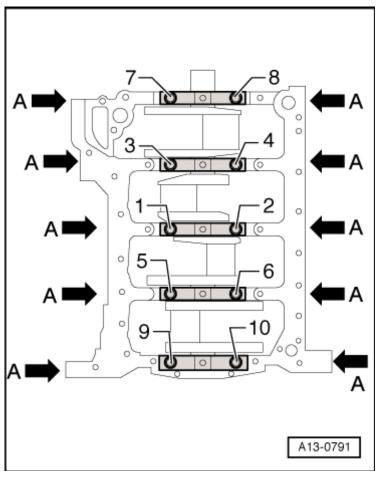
Crankshaft Bearing Cap, Installing Courtesy of AUDI OF AMERICA, LLC
